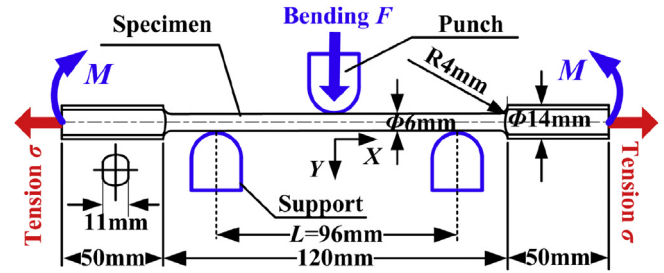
The dimension of specimen and it is tested by the combined tension and three-point bending loadings.
